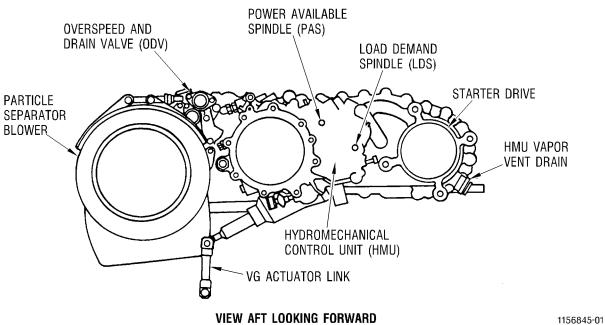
(T701, T701C, T701D) Component Locations on Accessory Section Module
